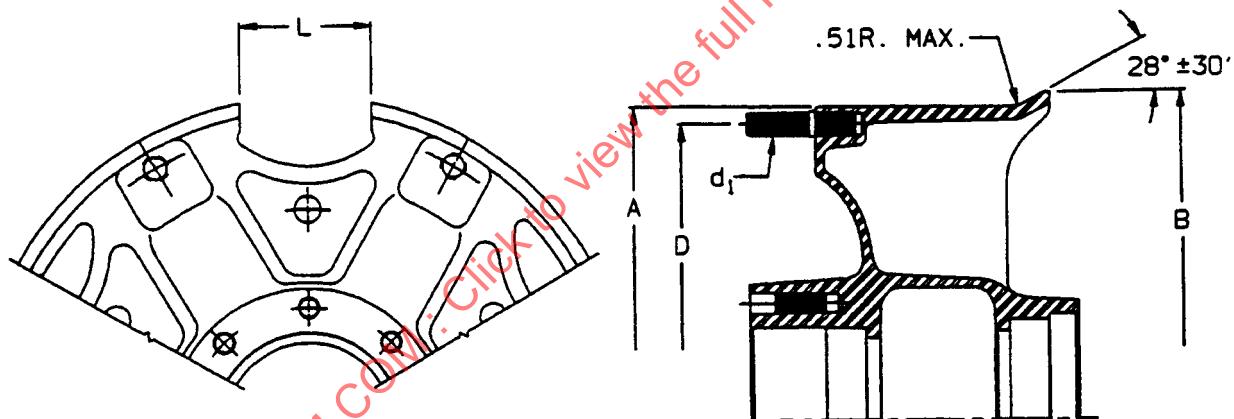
B—REAR WHEEL WITH SPECIAL RIM LOCATOR SLOT
